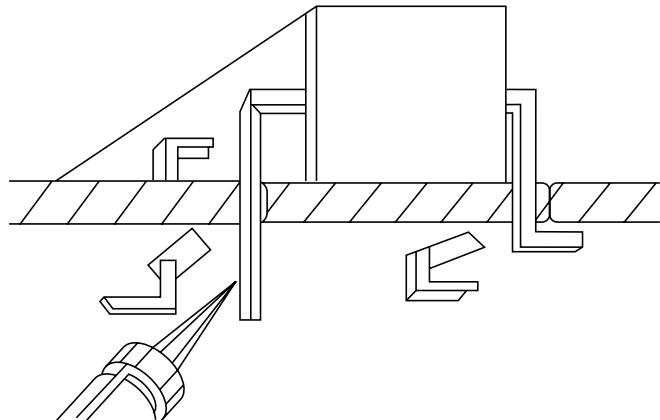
USE SOLDERING IRON TO PRY LEADS
